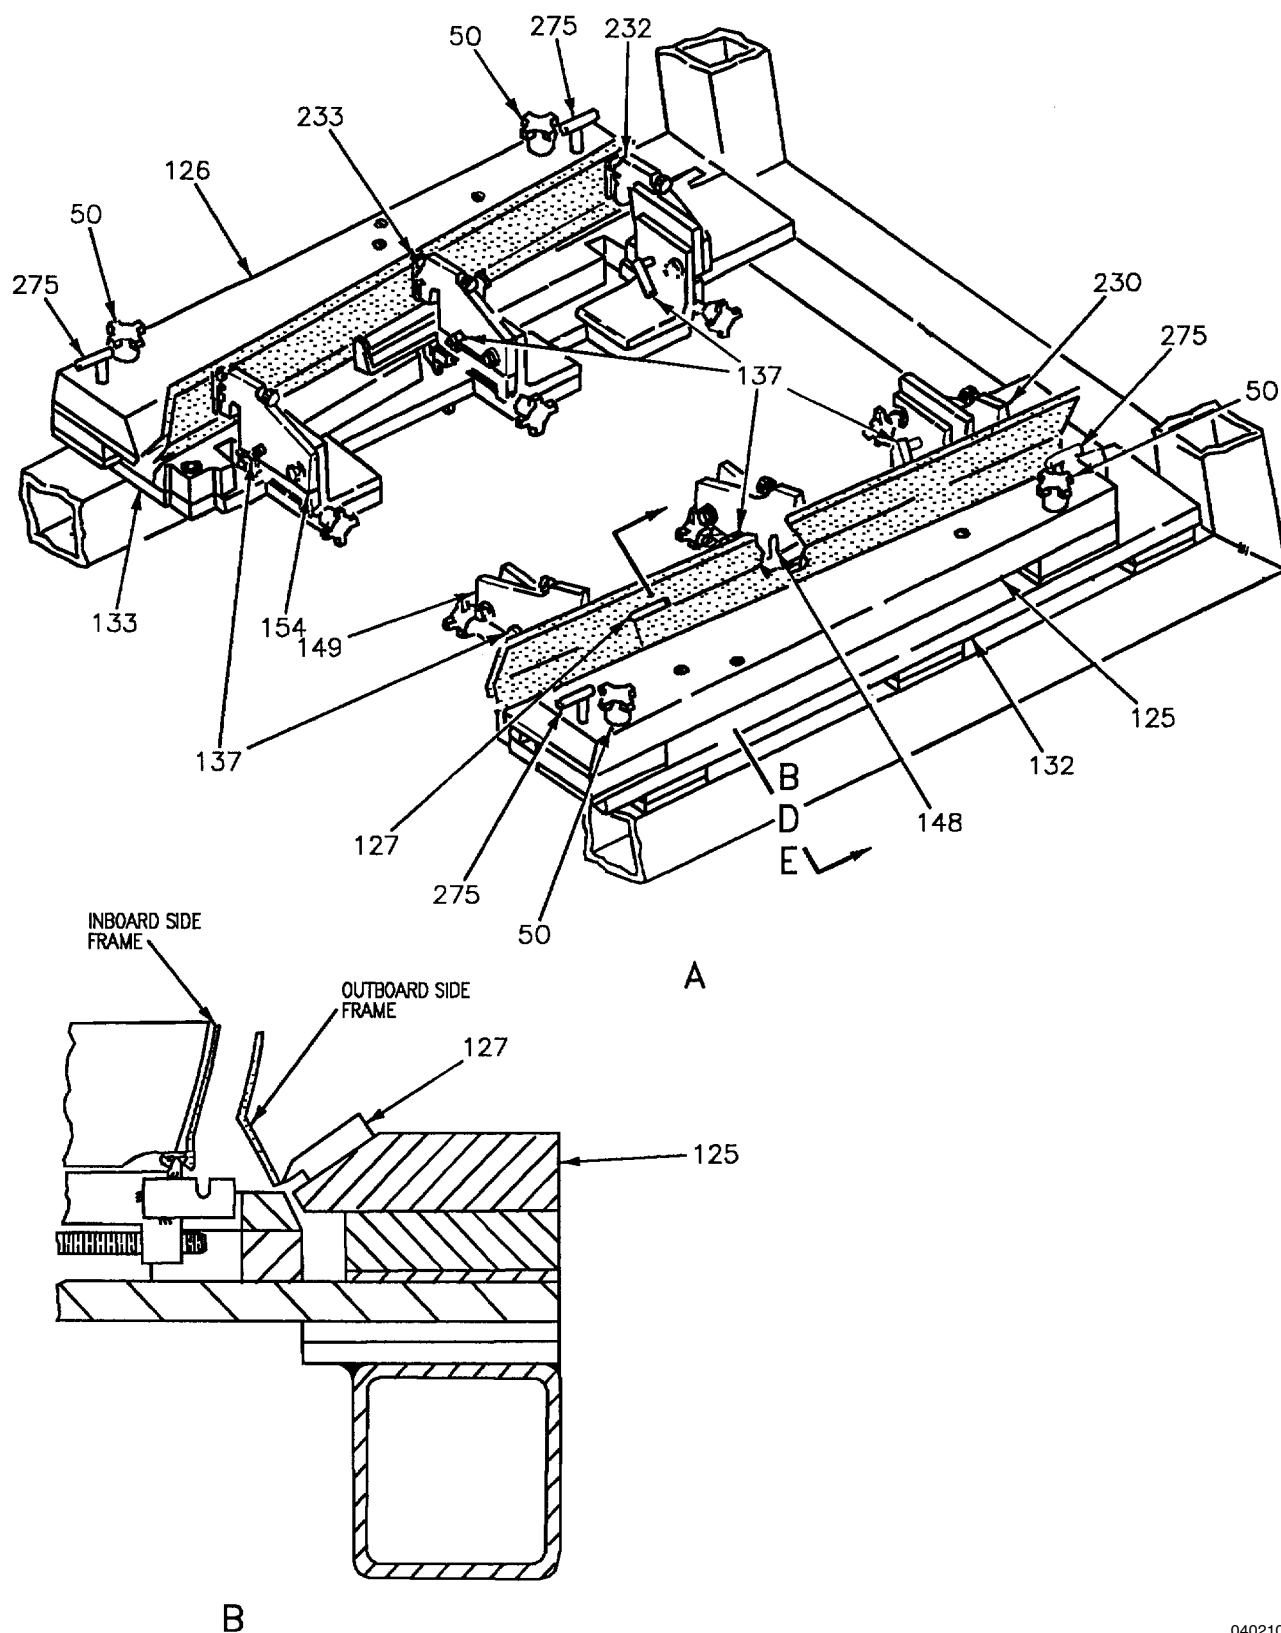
Inspection or Replacement - Outboard Side Frame (Sheet 2)
